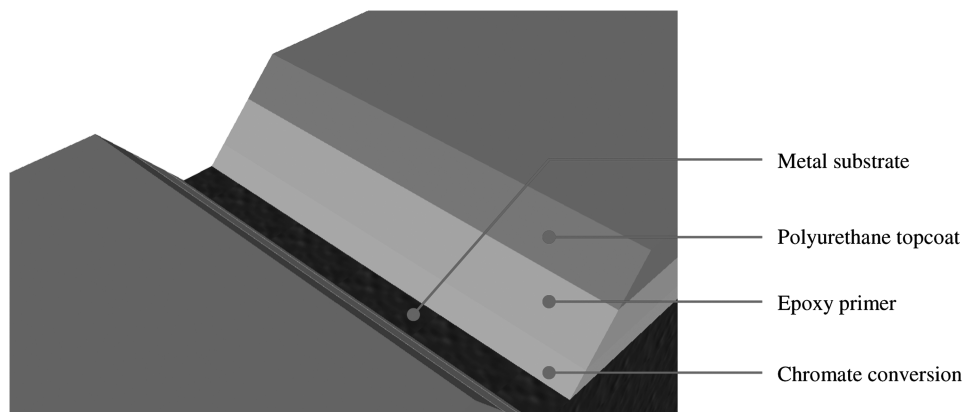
Typical aircraft coating system which consists of topcoat, primer, conversion coating, and the underlying metal.
